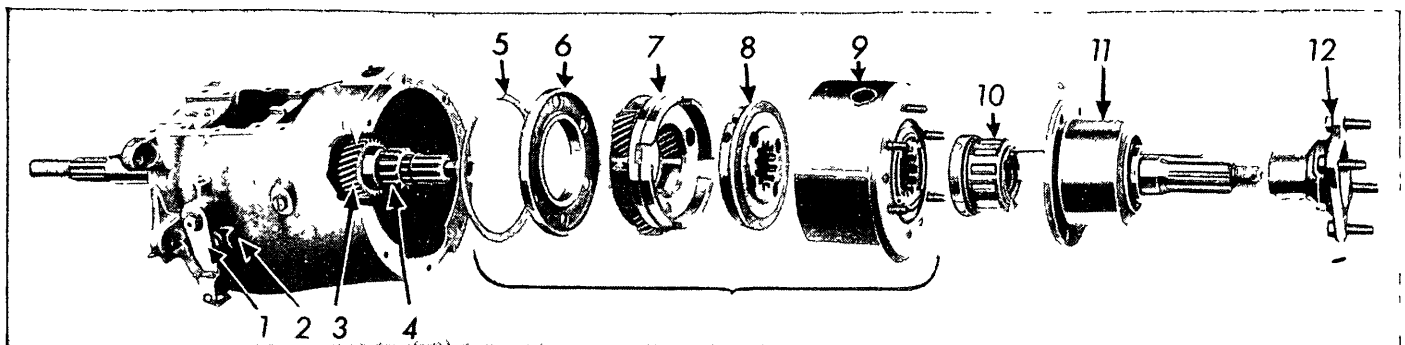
Sequence of assembling built-in type overdrive. See Fig. 6 for car application
